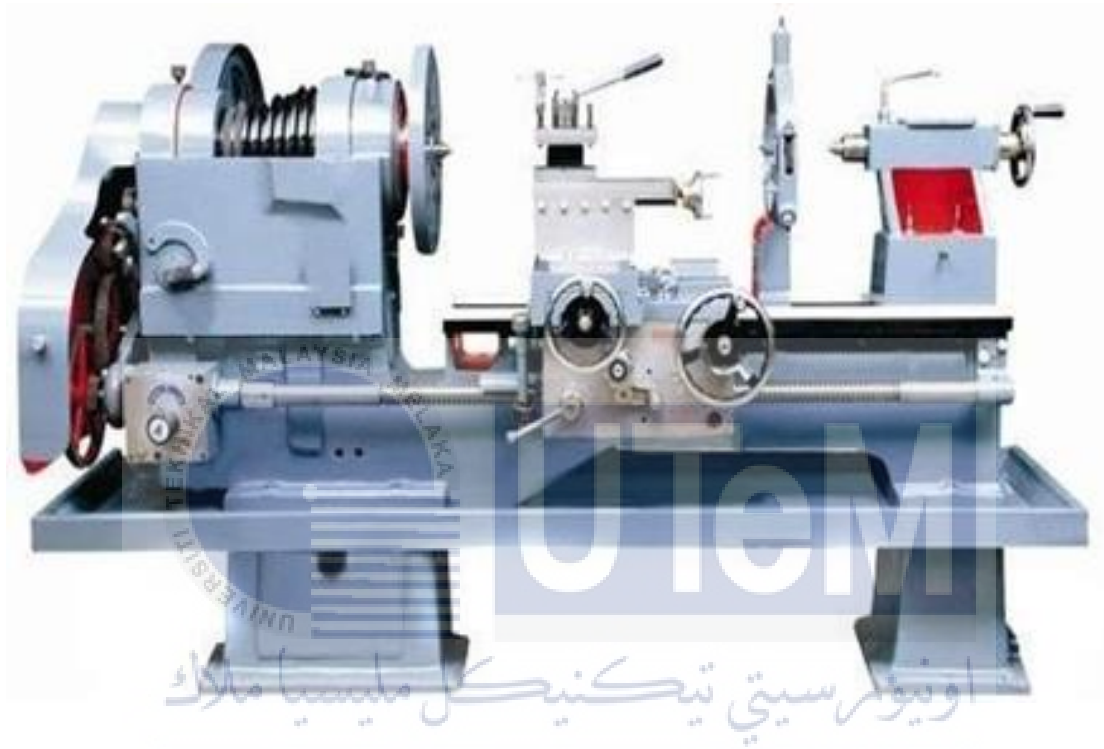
Example of special purpose lathe (Chauhan and Patel, 2020)
